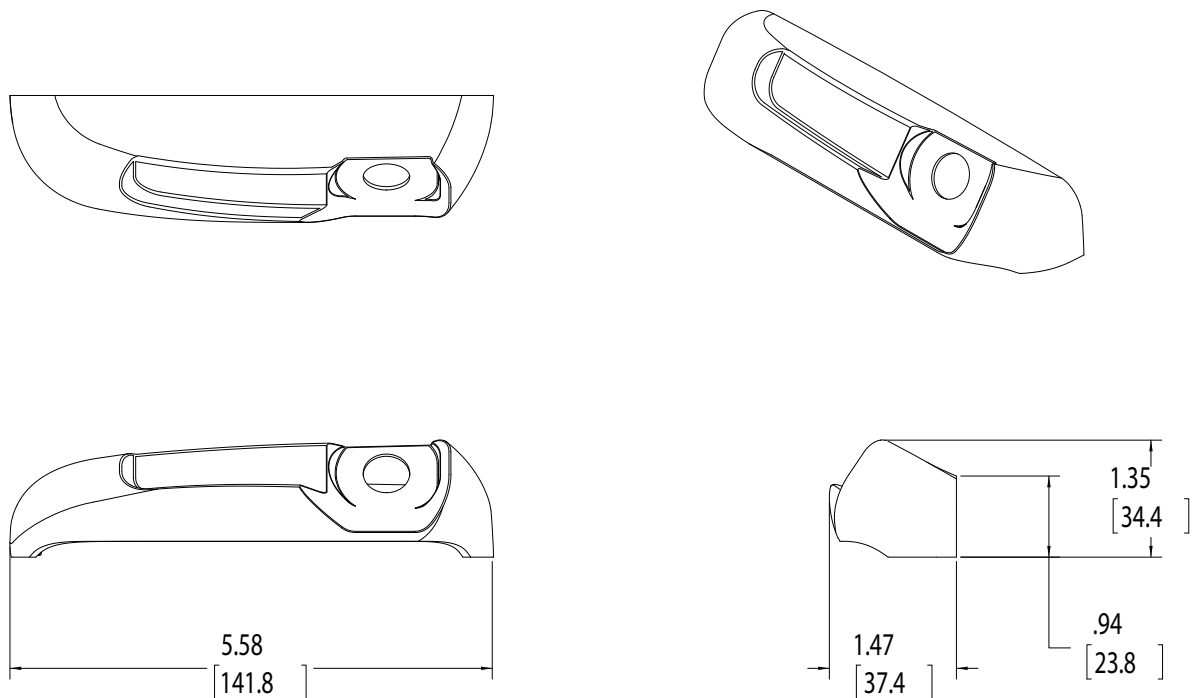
DIMENSIONS FOR FOLDING HANDLE COVER (LH) (SHOWN)
